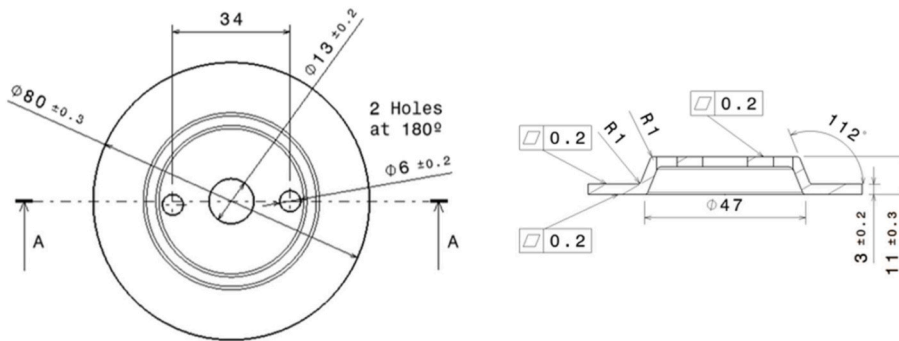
Dimensions (mm) of the CFRTPs central cover of the fabricated top mount.
